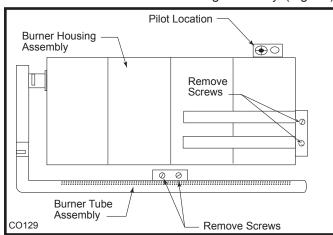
Remove screws holding burner housing assembly and burner tube assembly.
